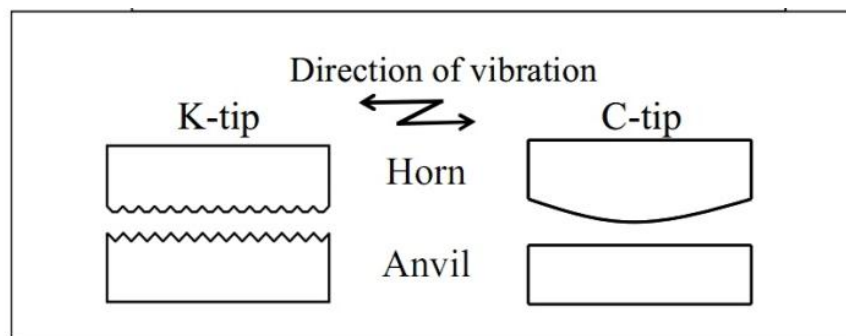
Schematic diagram for the K-tip and C-tip welding tools [39].
